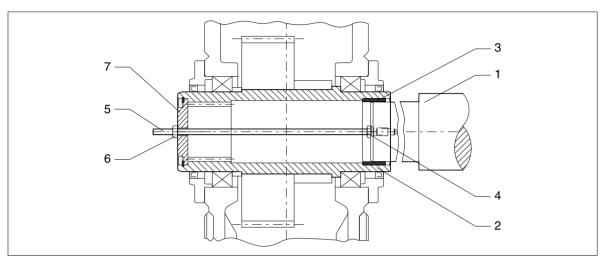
Hollow shaft with internal spline, mounting with DU bush
